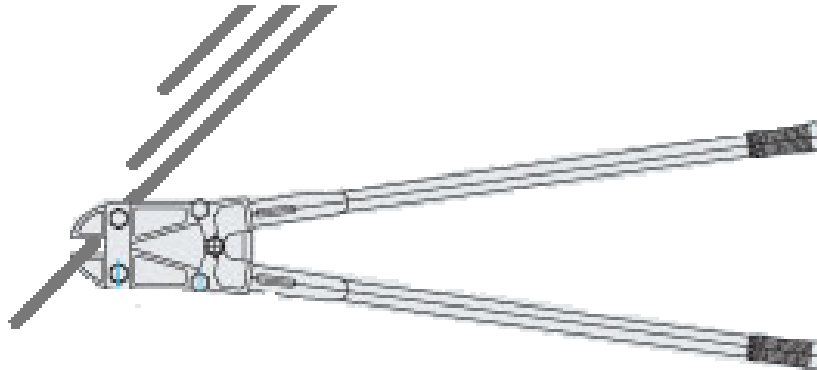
Cutting the Electrodes by Iron Cutting Scissor
